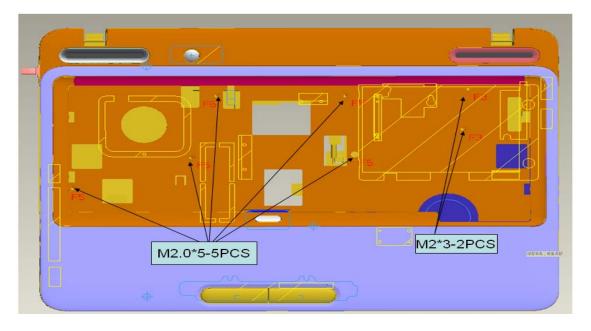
Remove the screws (front) and Top cover assembly
